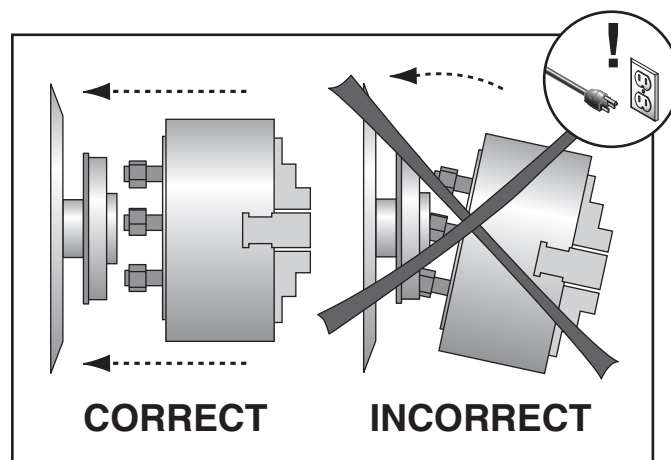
Inserting chuck standoff studs into spindle and locking flange holes.
